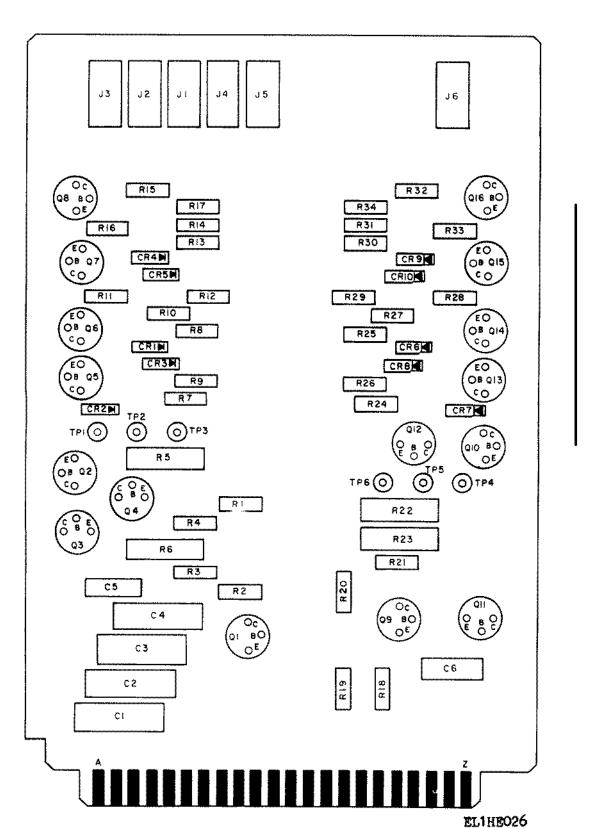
Printed-circuit card assembly A5 (PC 80034150), component location diagram.
